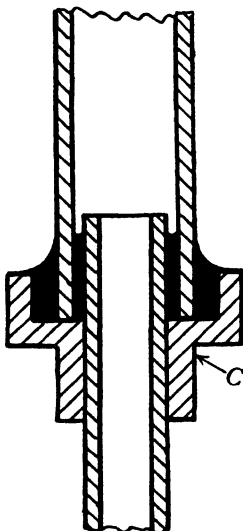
An annular joint, between metal tubes, which does not allow solder or flux to pass through it, and can be made and opened easily.
